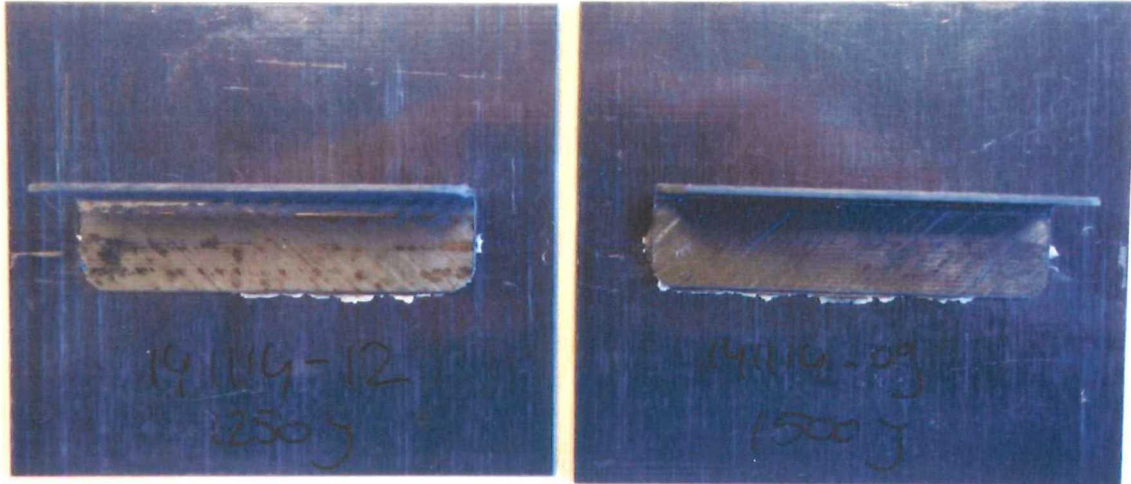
A clip welded with 1,250 [J] (left) and a clip welded with 1,500 [J] (right). In case of the right clip, fibers are squeezed out.
